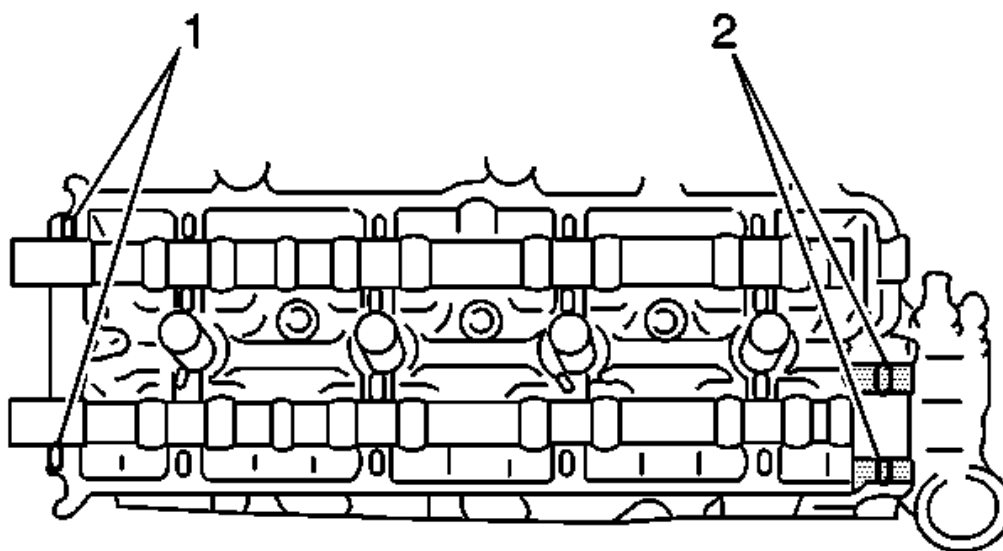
View Of Exhaust Camshaft End Housing & Dowel Pins
